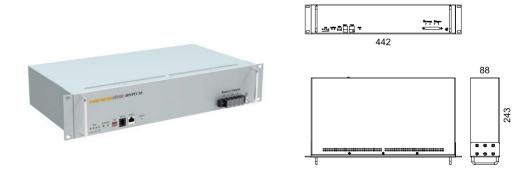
Appearance & Mechanical Drawing of 48NPFC20
